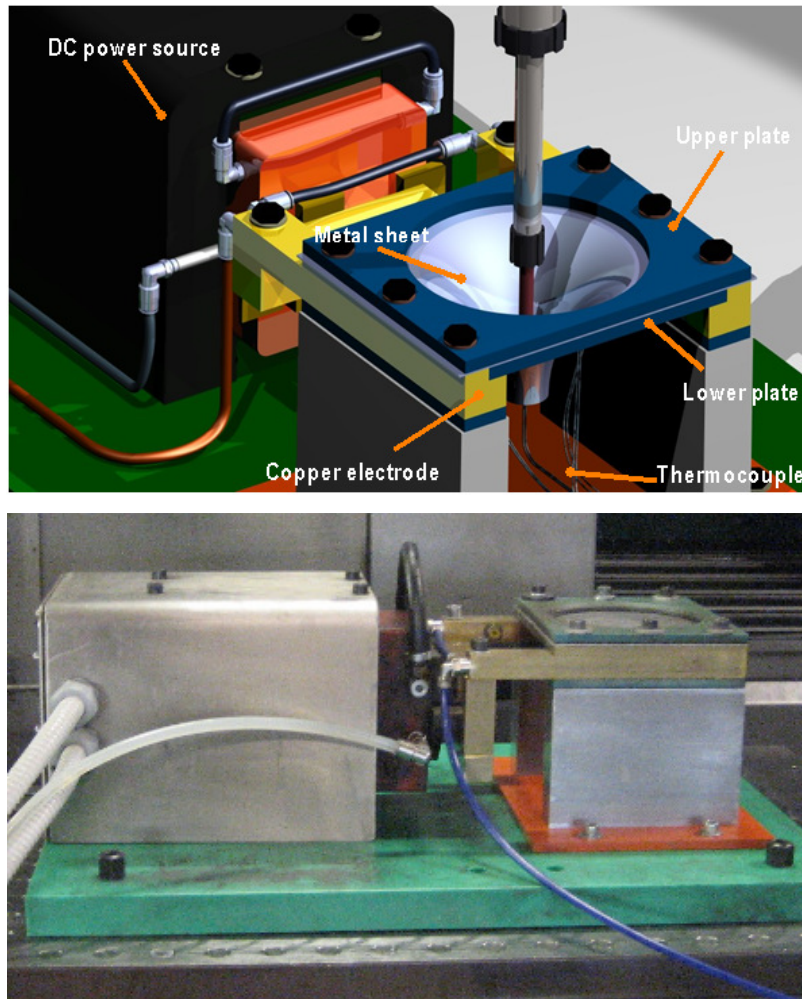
Fixture and jig system for SPIF process with metal materials
